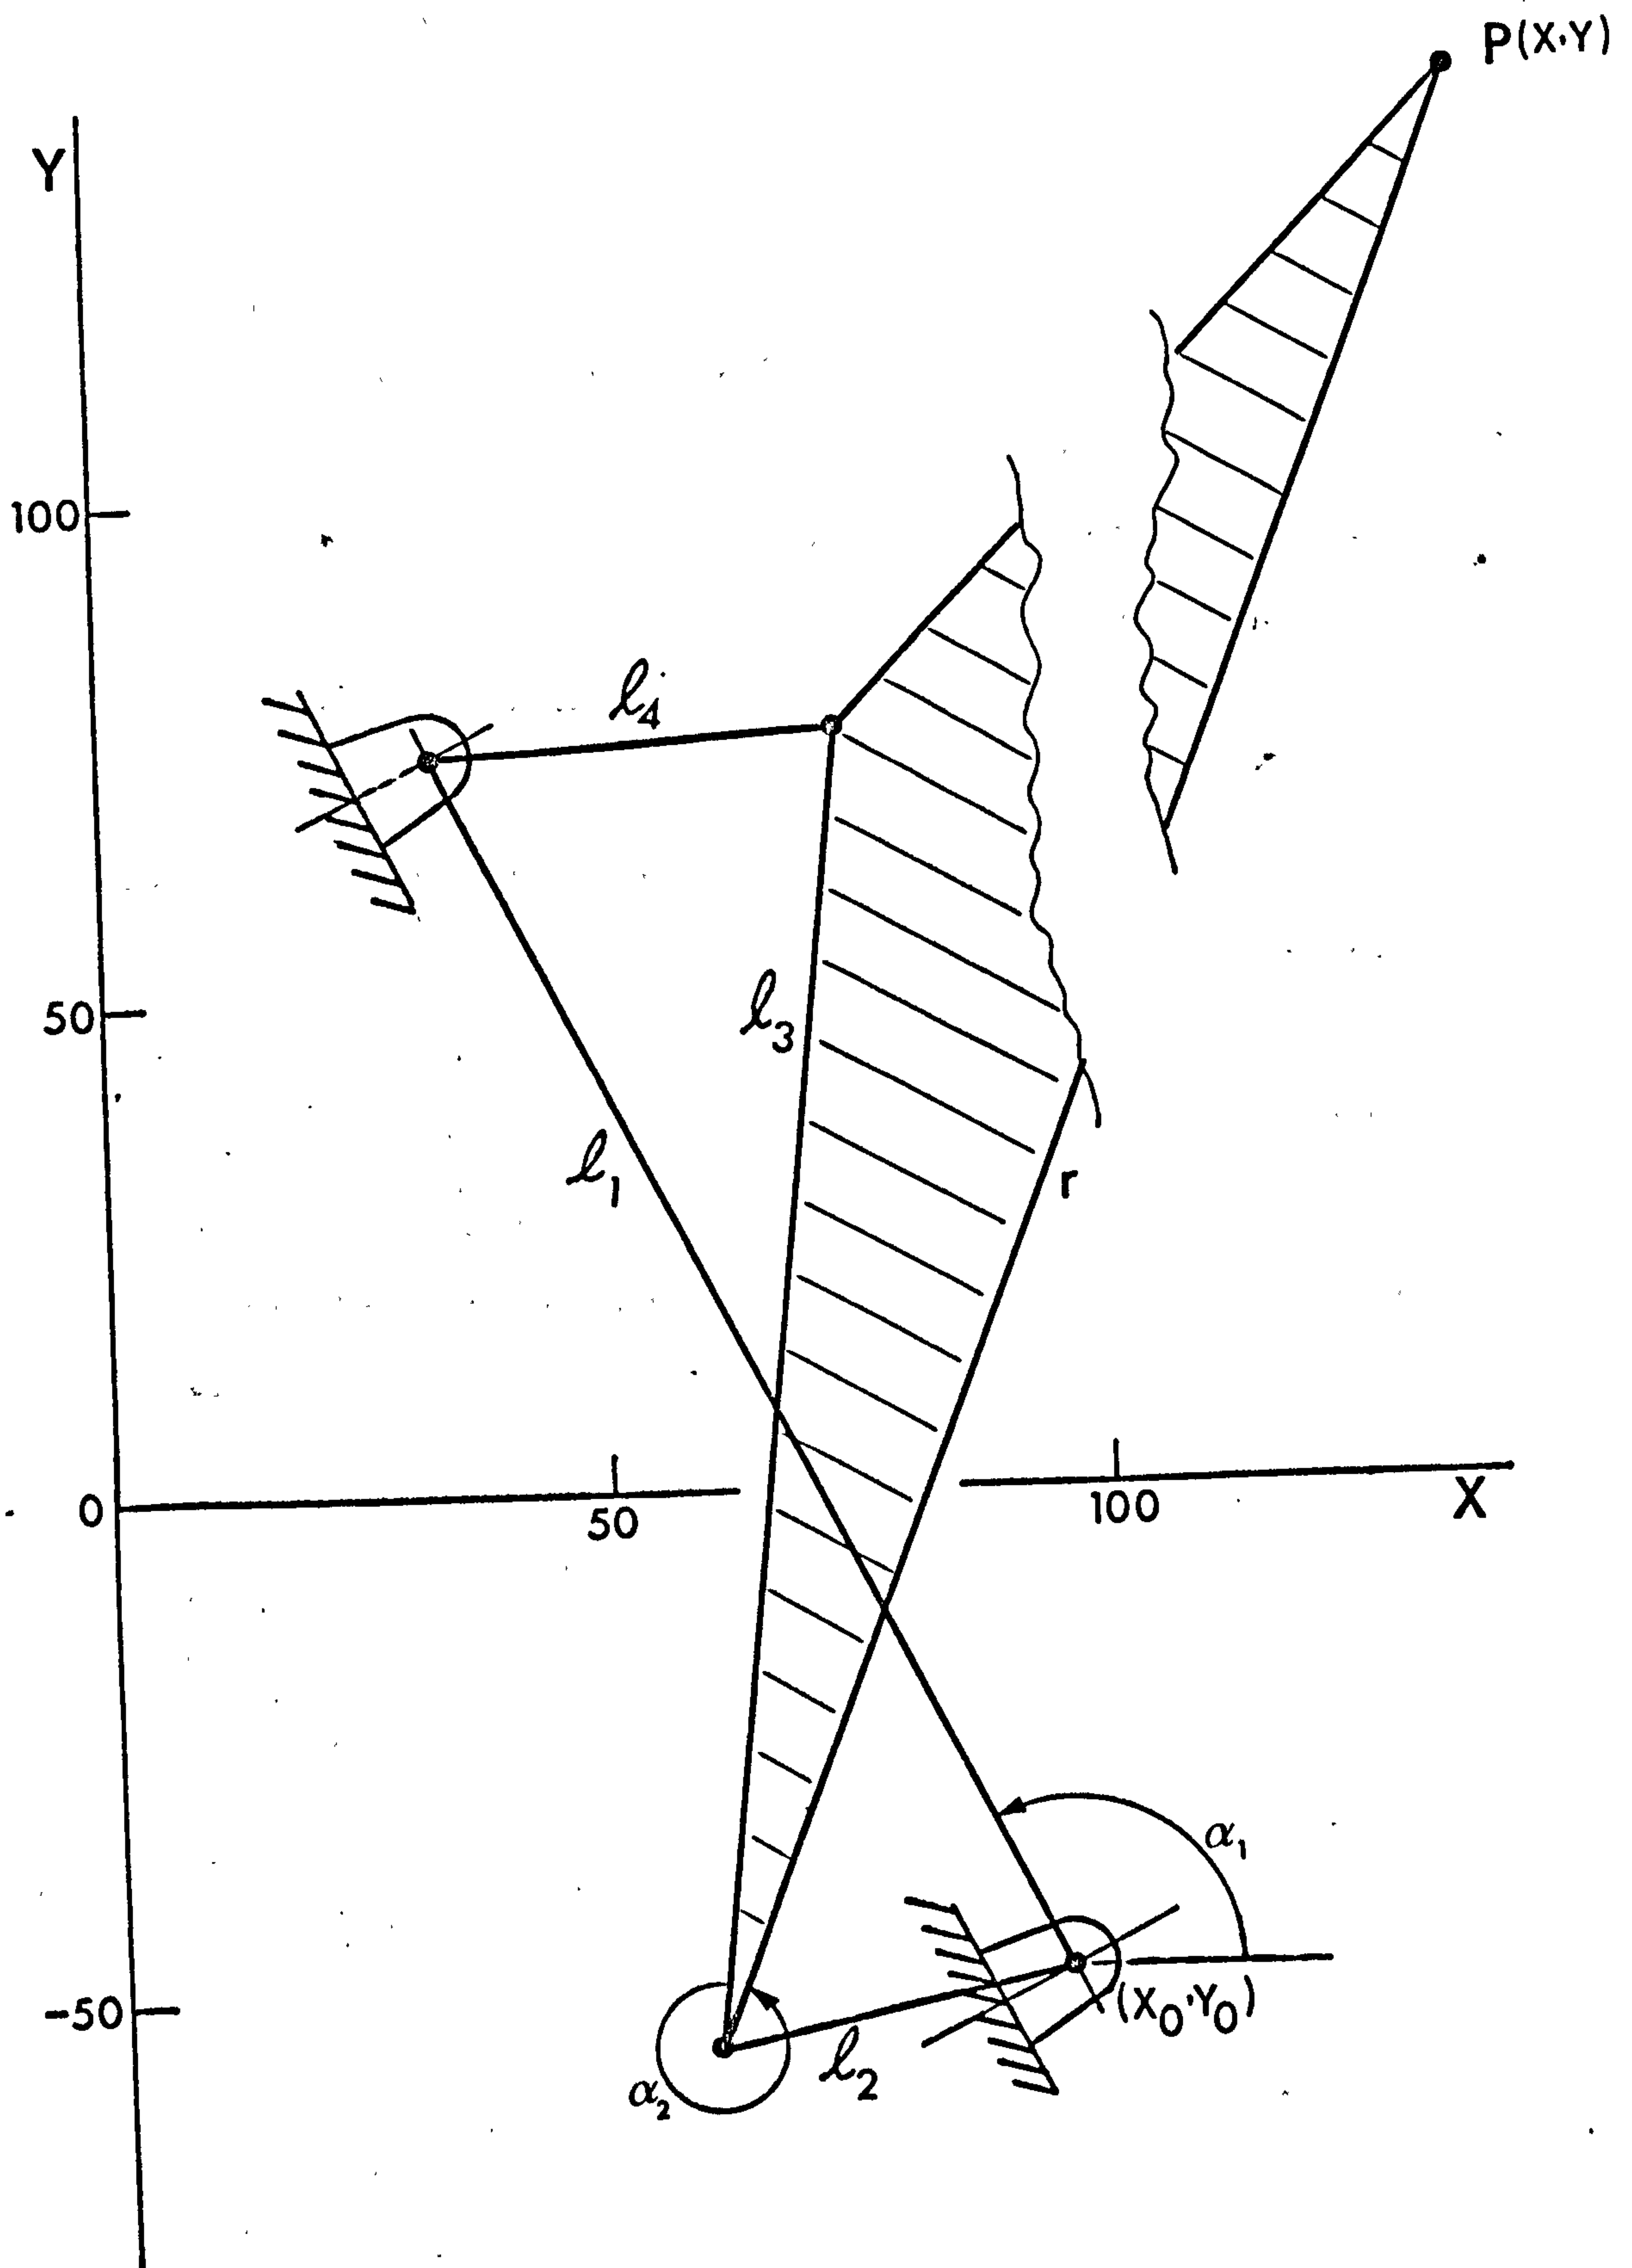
THE OPTIMUM FOUR-BAR LINKAGE PACKAGING MACHINE.
